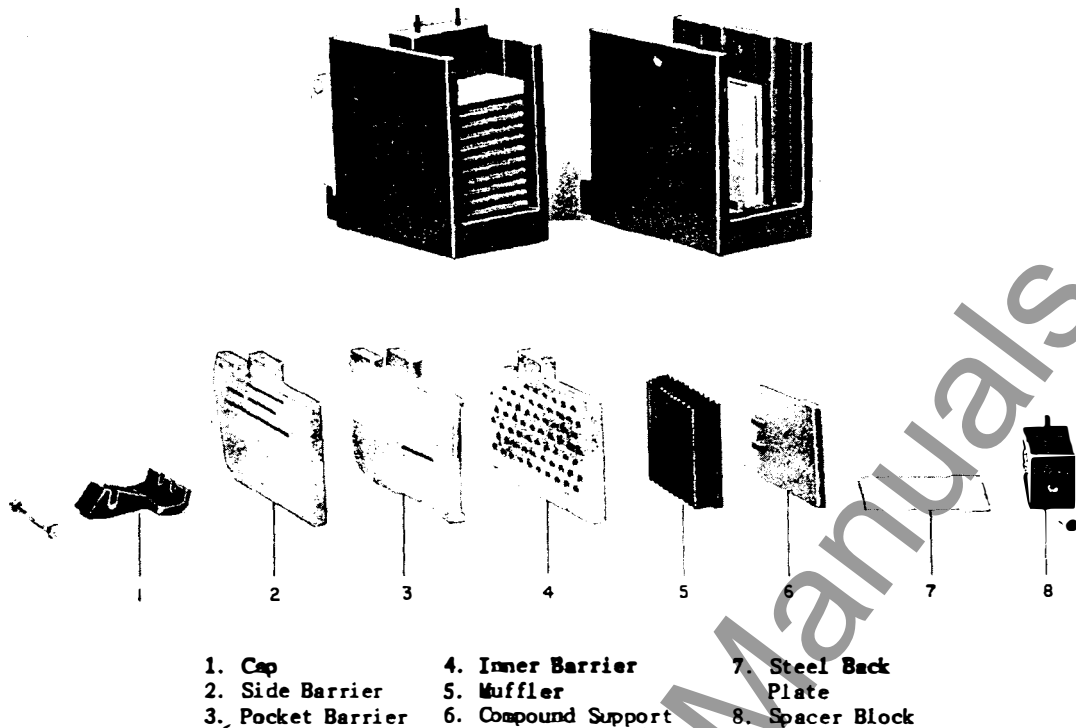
Dis-Assembly of Arc Quencher to Inspect, Inner, Side and Pocket Barriers
